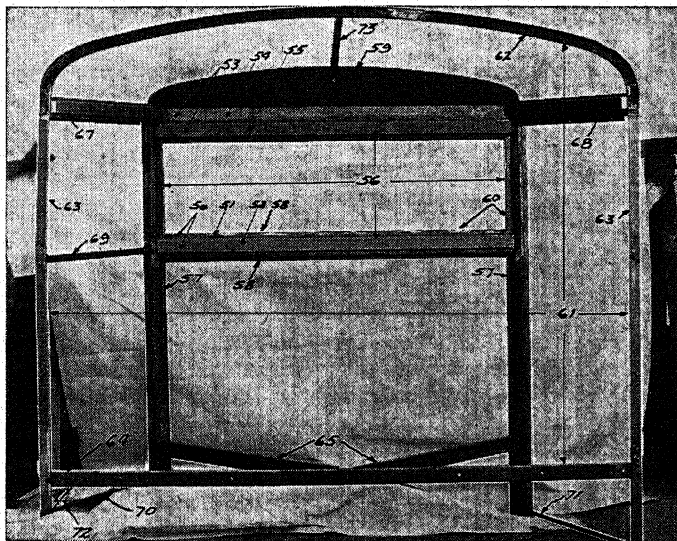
Arc welded body—rear view of front end frame assembly.
